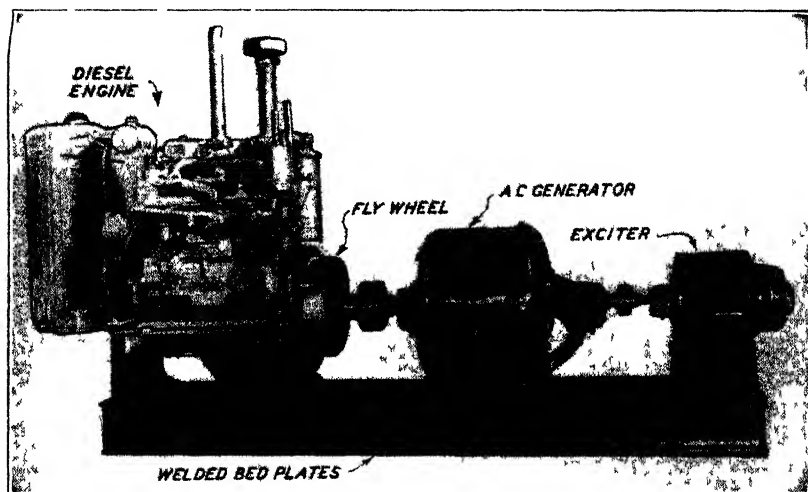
Diesel Driven 25 Kw, 720 R P M Coupled-Type A C. Generator
